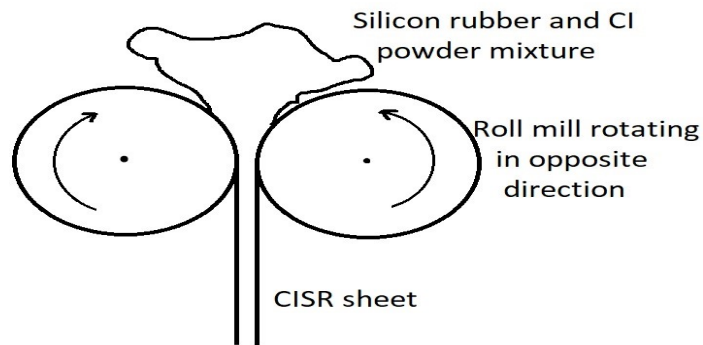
Fabrication process of CISR sheets on two-roll mill assembly
